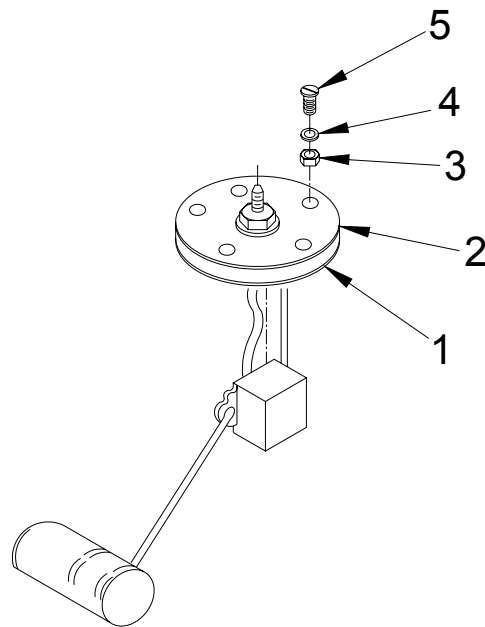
FUEL SYSTEM ASSEMBLY/FUEL TANK/FUEL TANK PICKUP TUBE
